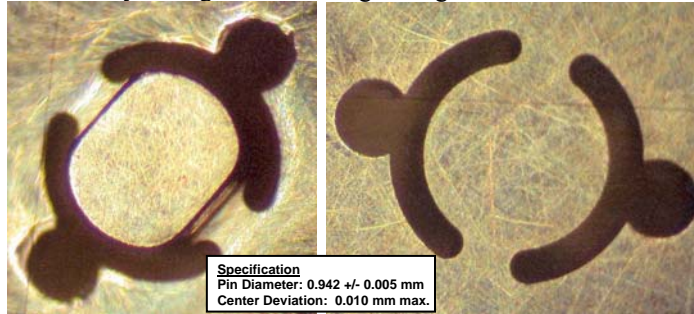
Top and Bottom Views of Prototyped Clock Plate Pivot Pin with Bearing Surfaces Trimmed by a Micro-Wire EDM Machine
